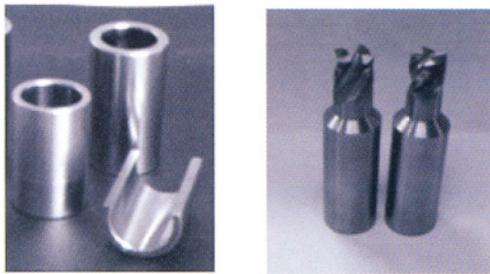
LRM fabricated (a) Colmonoy-6 bushes (b) WC-Co End-mill
